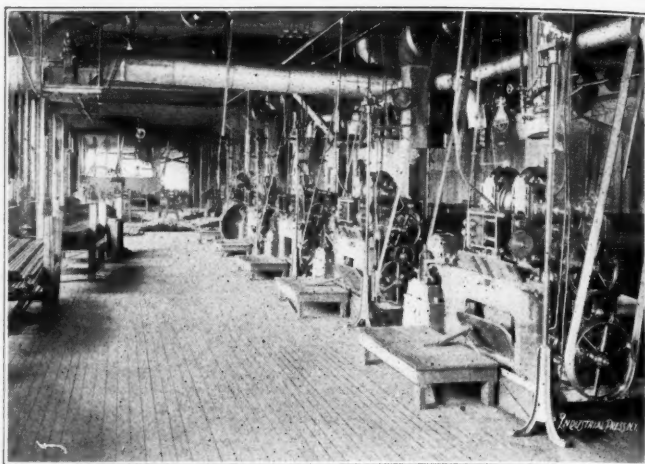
Row of Electric Welding Machines in Tubing Department.
